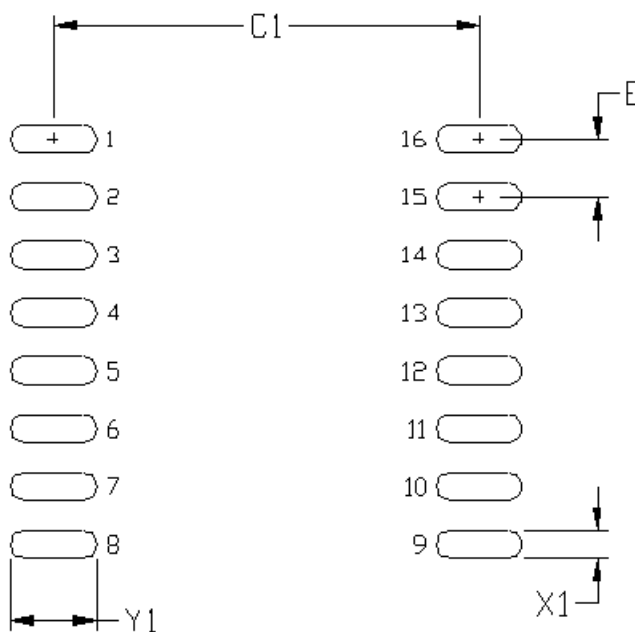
PCB Land Pattern: 16-Pin Wide Body SOIC
